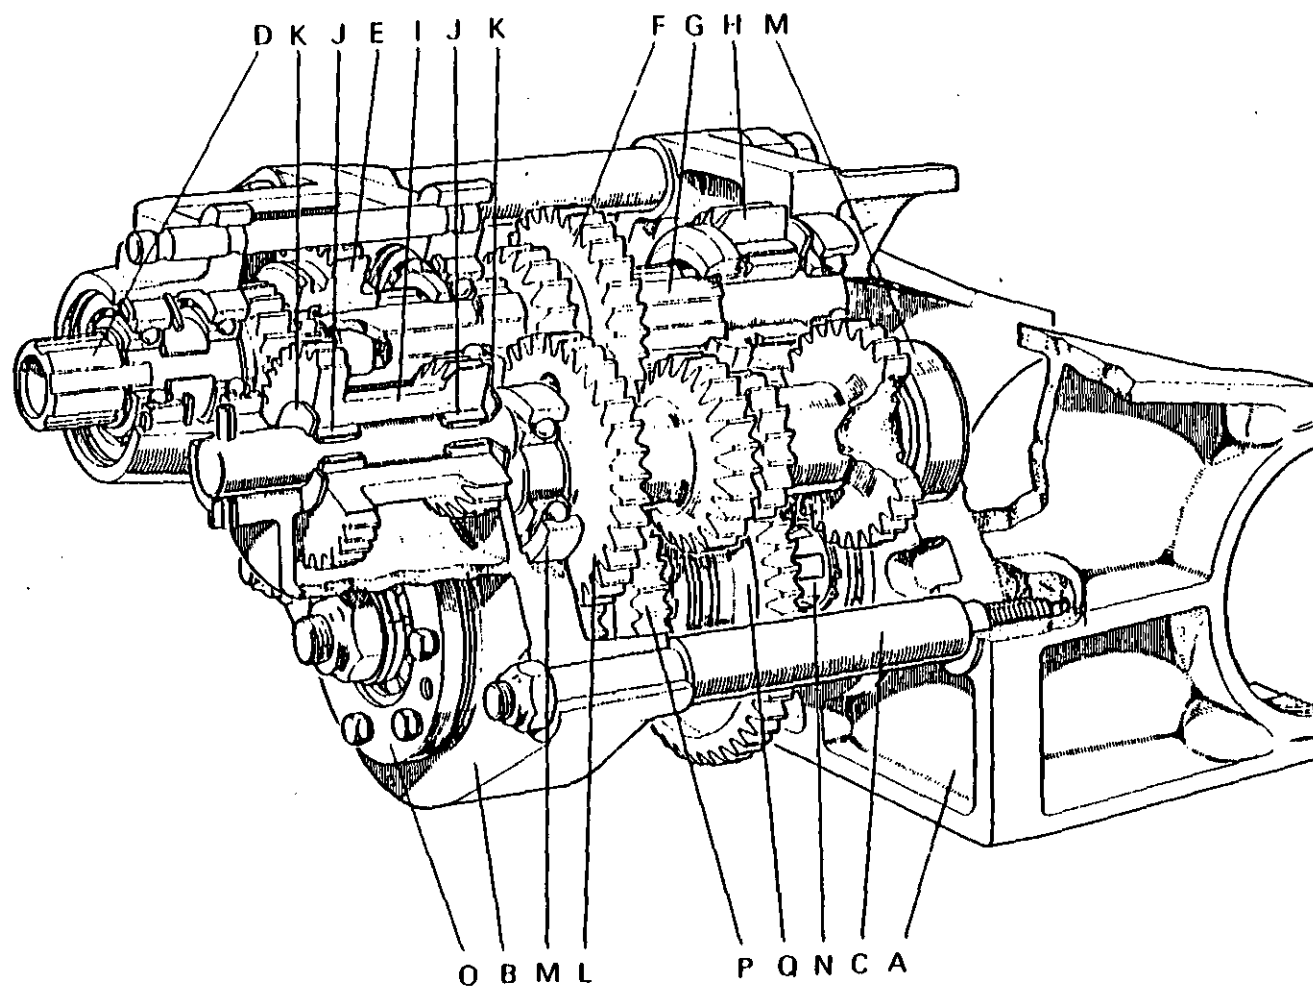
TWELVE-SPEED GEARBOX — 770 TRACTORS
